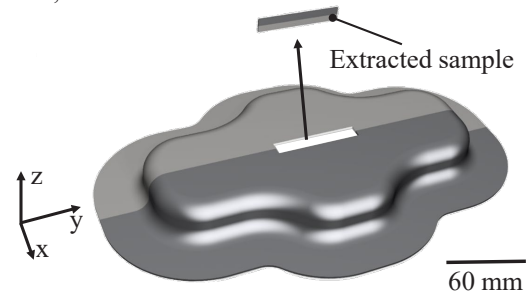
Illustration of a lengthwise half carburized, hot stamped cruciform cup with an extracted sample.
